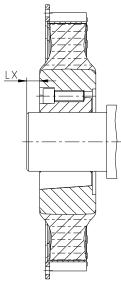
Mounting position of taper clamping sleeve to the shaft end
